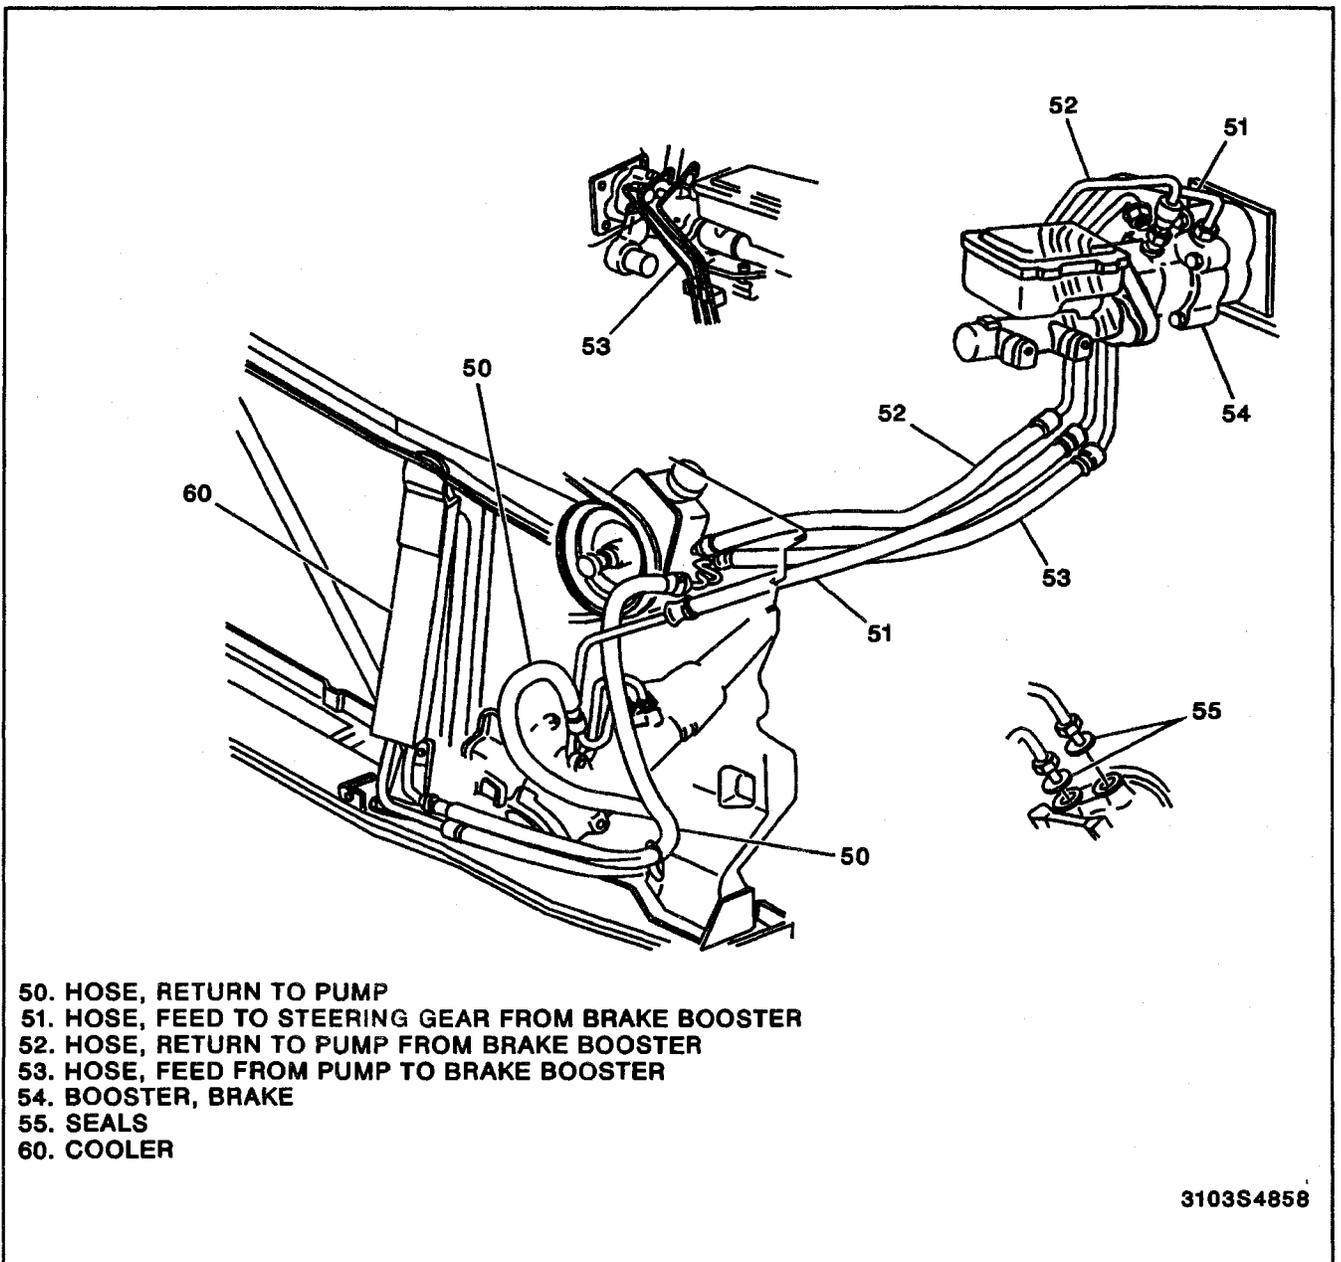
Hose Routing (CK1, 2 and 3 with 6.5L Diesel Engines)
